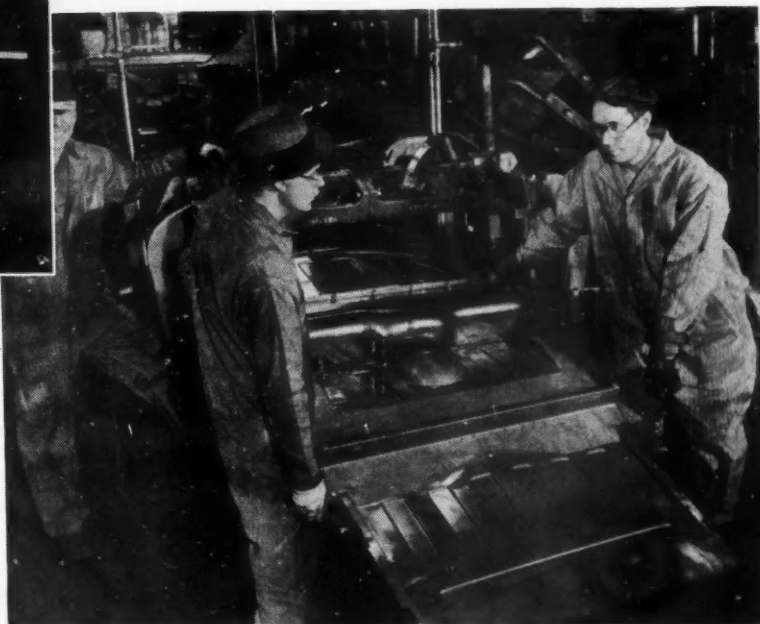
50 spot welds are produced automatically with this hydraulic gun welder, timed to hit one spot at a time in sequence. Here the dash is welded to the cowl side panels.
